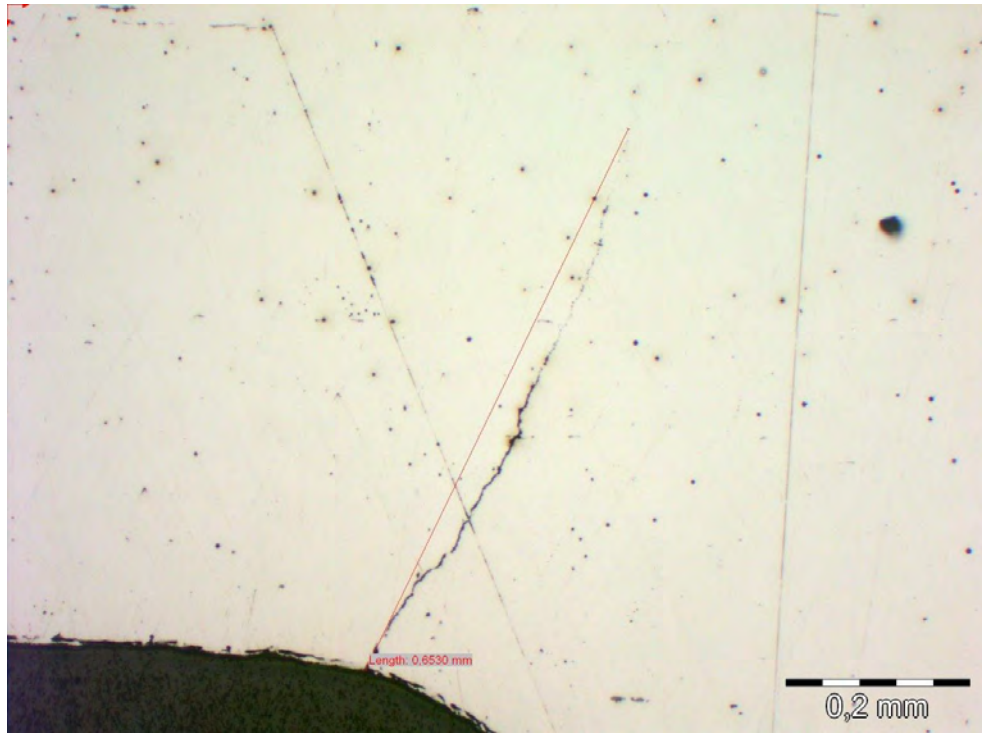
Crack at segment B, first ridge on barrel no. 1393 (first cut)
